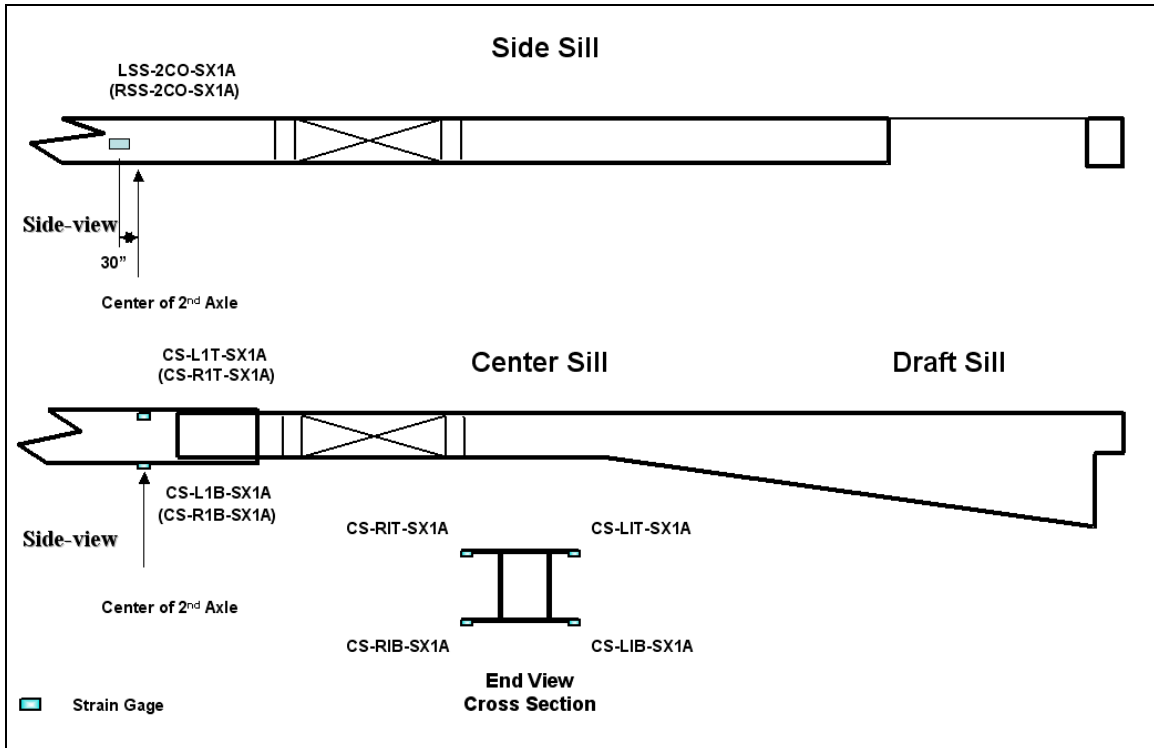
Strain Gauge Layout on Car 248 (Leading) Center and Side Sills
